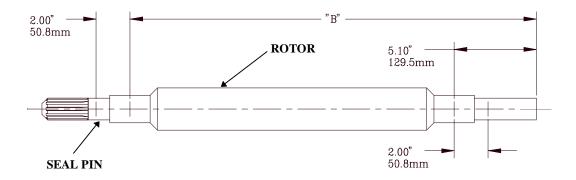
Seal Pin Locations For Rotors With External Bearings
